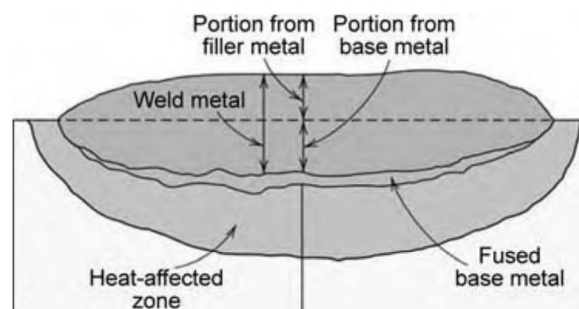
Schematic diagram of the the cross section of a Laser Cladding regions. Provided by Westinghouse Electric Company, WEC Welding Machining, LLC.
